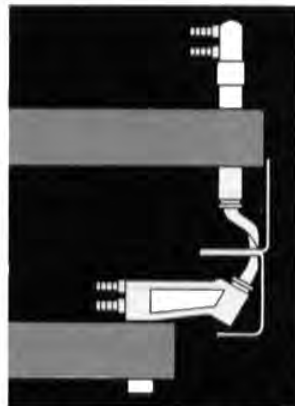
An offset holder with bent tip is used to weld close to the corner of a box section.
